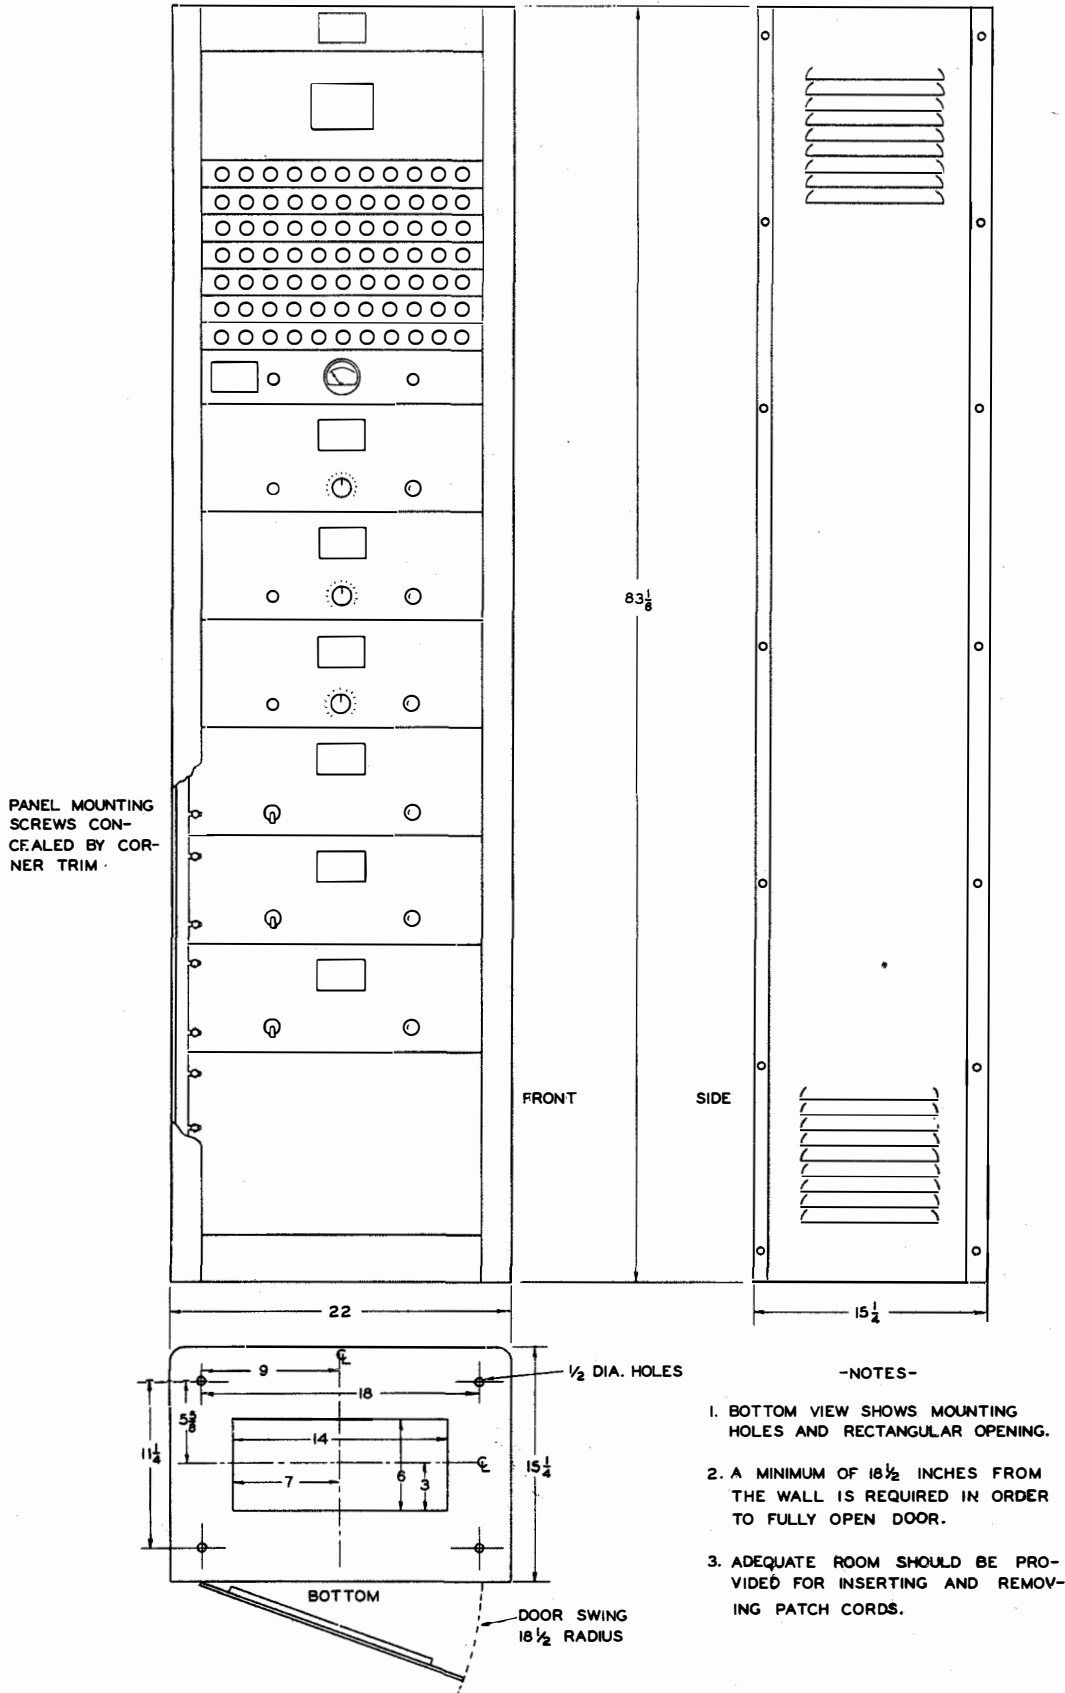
Model RXA Antenna Multicoupler Assembly, Outline and Mounting Dimensions
